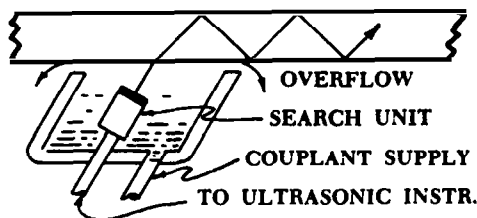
Bubbler Angle-Beam Technique (Plate)
